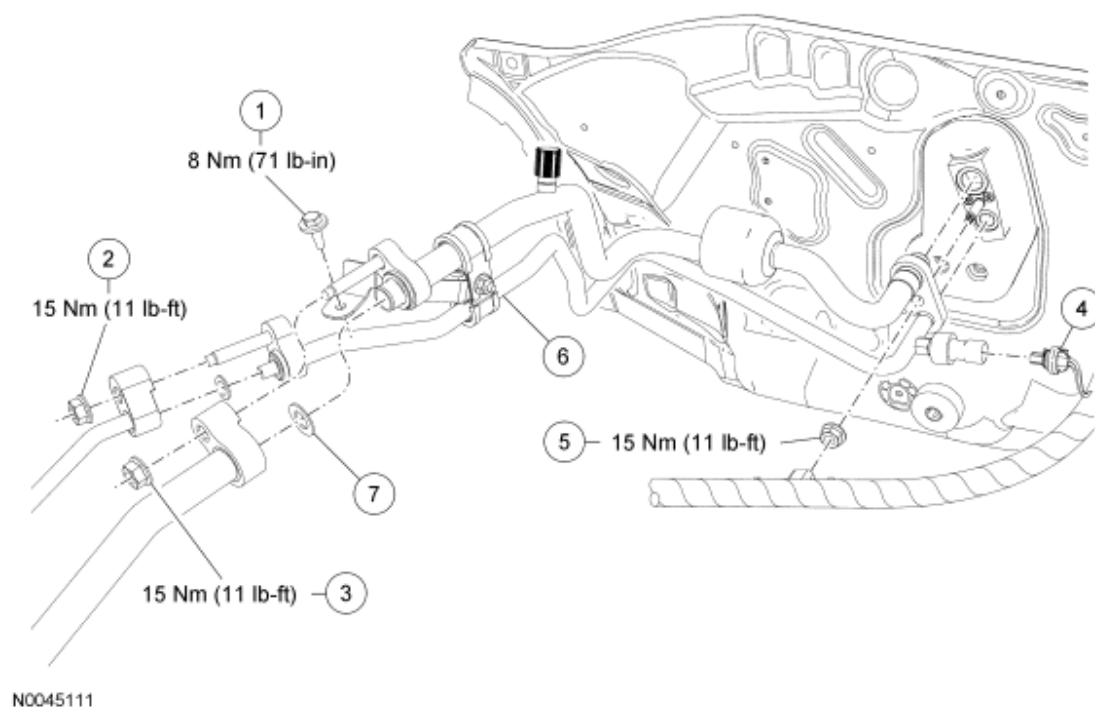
Exploded View Of Thermostatic Expansion Valve Manifold & Tube Assembly With Torque Specifications
